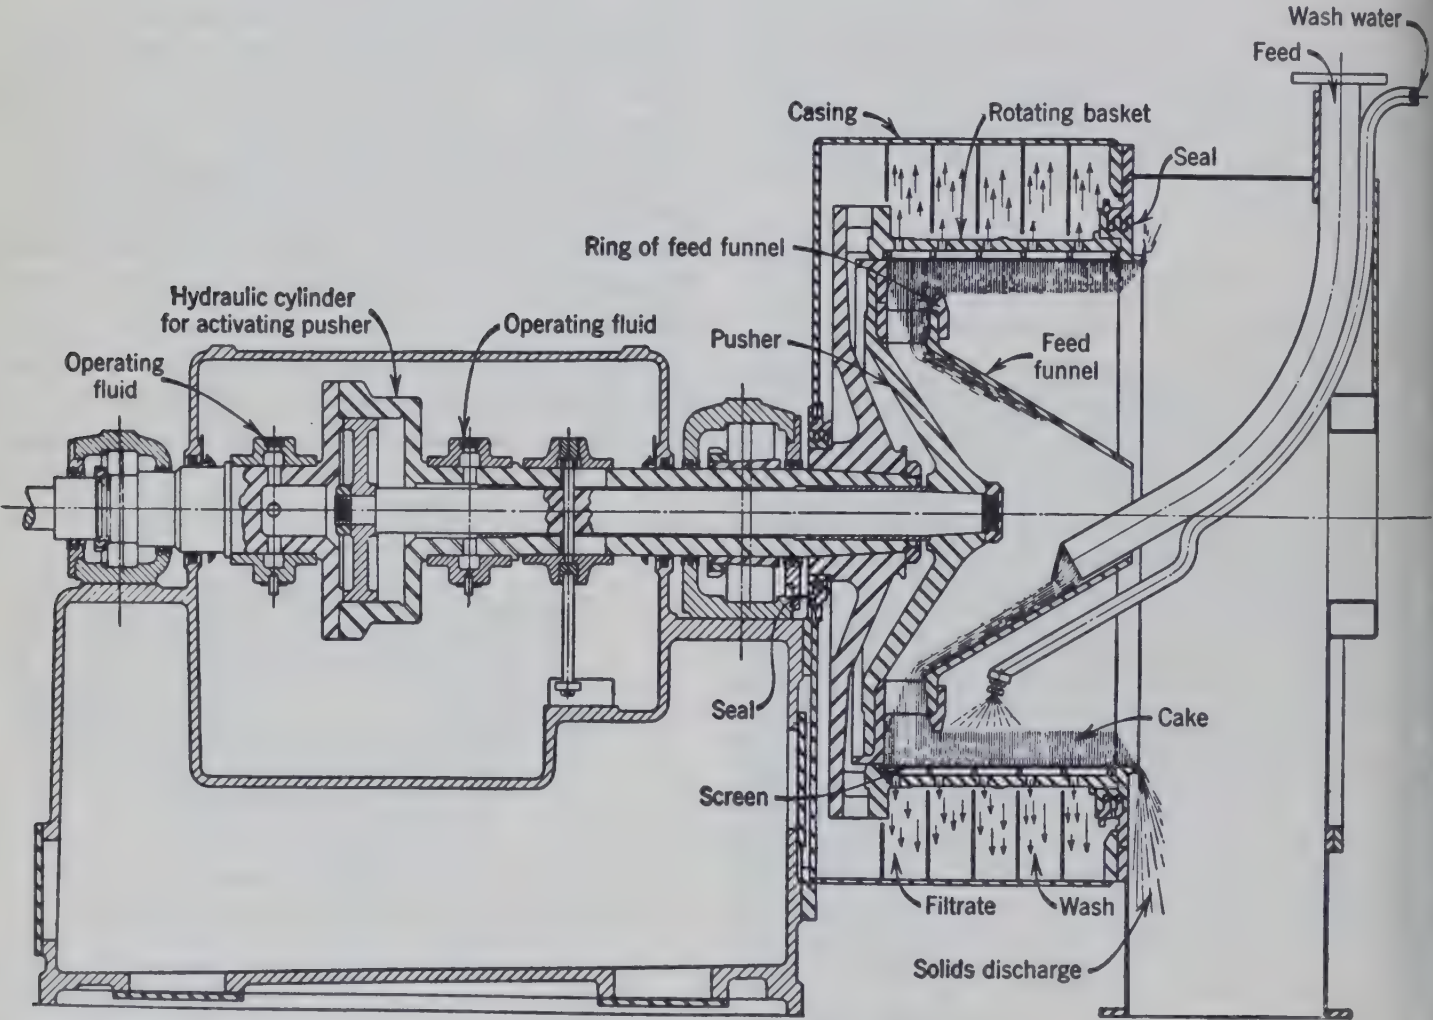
Sectional drawing of a continuous perforate-basket centrifugal with pusher discharge. (Baker Perkins, Inc.)
